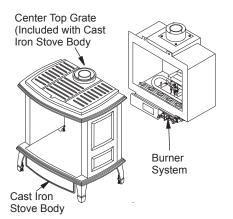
Installing Burner System Into Cast Iron Stove Body
